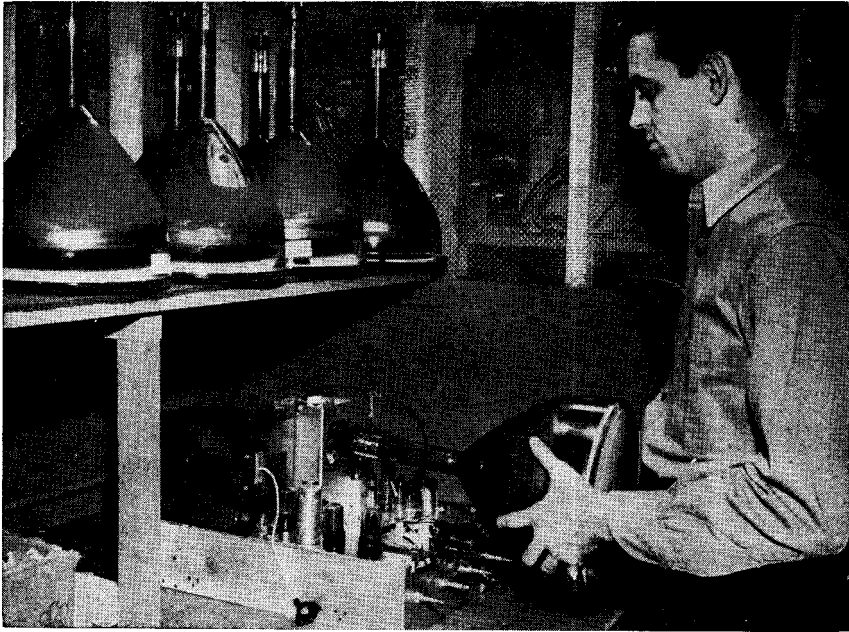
Correct way to hold a picture tube when inserting it in the yoke. (Admiral photo)
